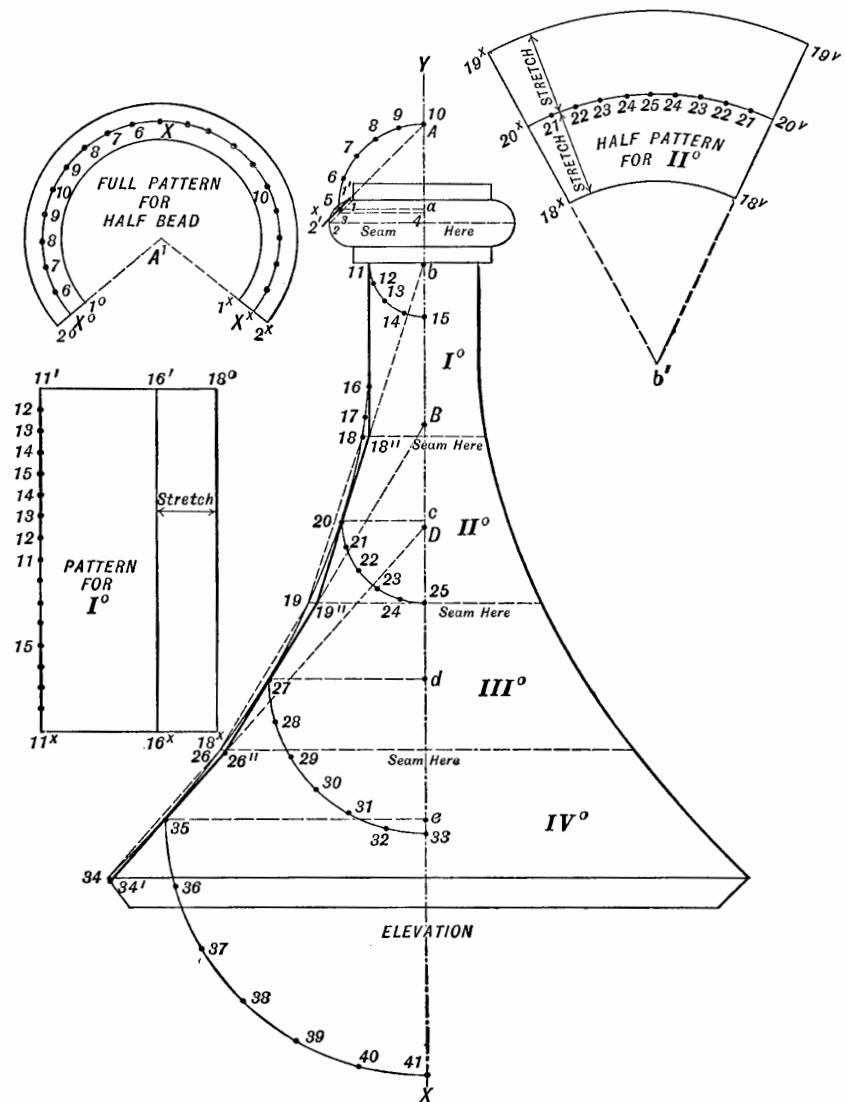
Obtaining Radii and Patterns for Bead and Shaft
